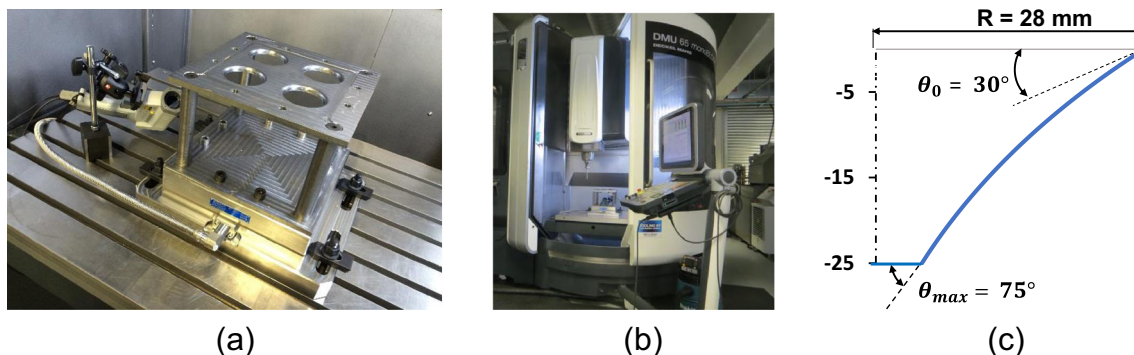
Depiction of the SPIF test setup: the blank-holding fixture a attached to Kistler 9255C and b mounted on a CNC table. c the benchmark profile
